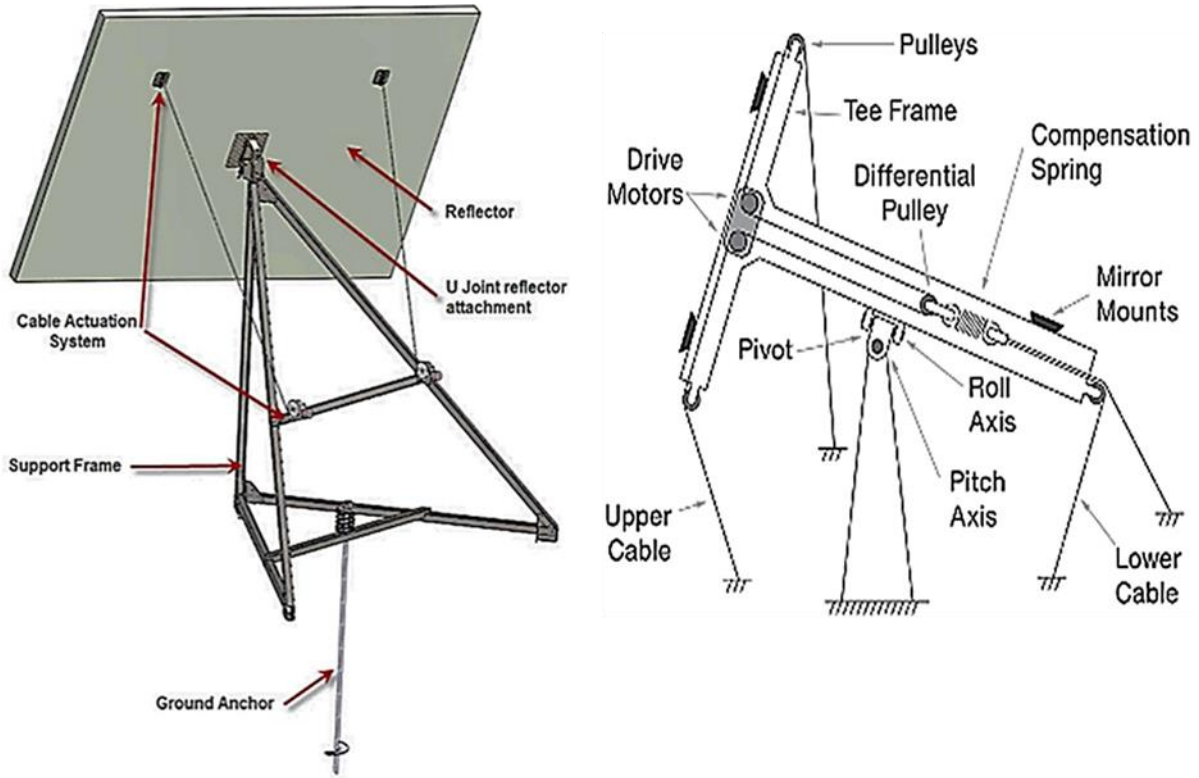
(left) CAD model of Google's cable heliostat [11]. (Right) A schematic showing Heliogen's T-Frame cable heliostat [12].
